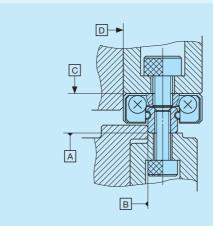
Reference mounting surface of size 2, 3, 4 and 6 series and typical mounting structure
